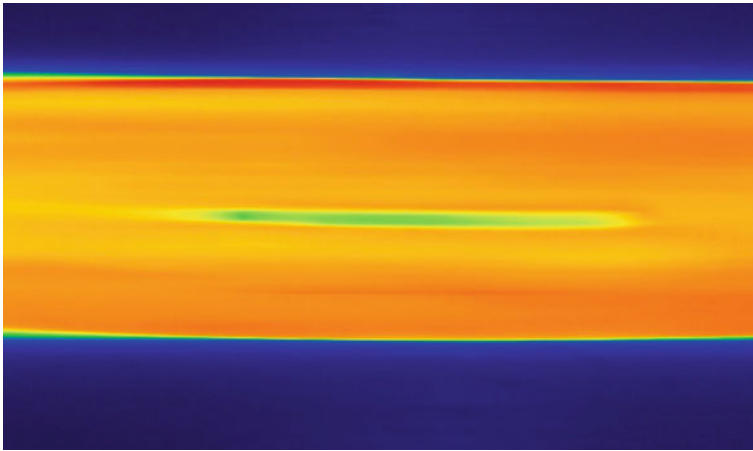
Thermographic image of an FRP tape with incorporated embossment during the laser beam welding process
